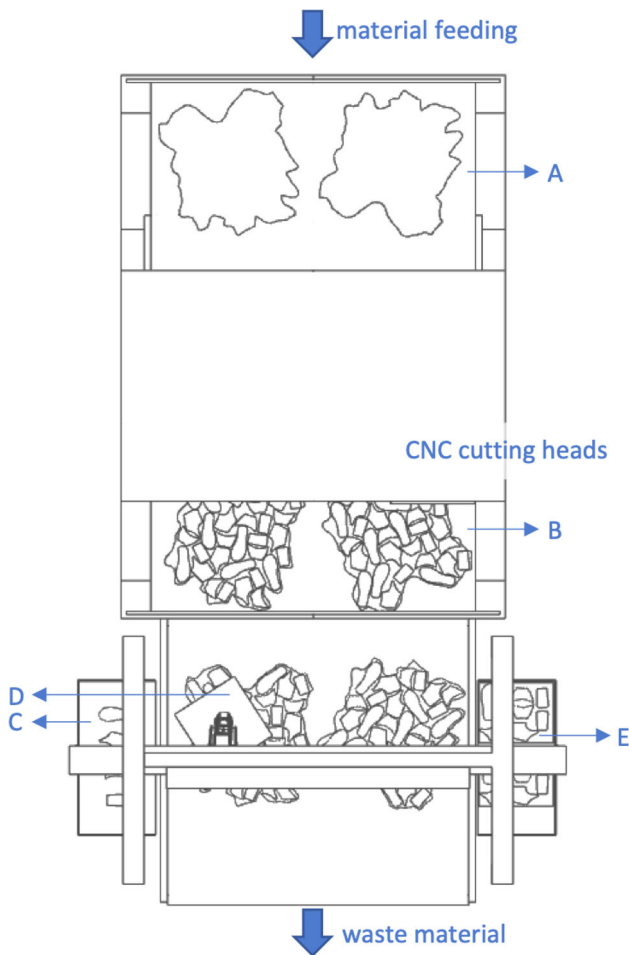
Description of the industrial process showing a CNC cutting machine and the pick-and-place machine proposed in this project
